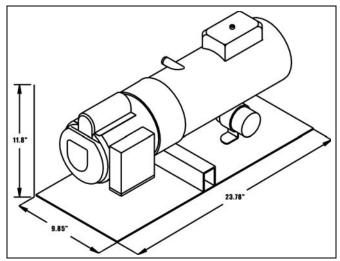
Heater Tray Mount Dimensions of DBW 2010
